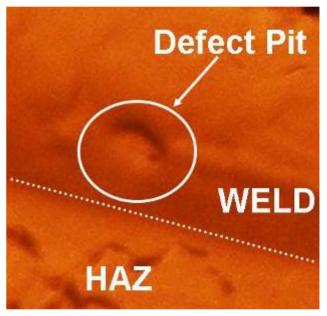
Defect located with second sound on a cavity equator weld. The defect is circles and the weld and heat affected zone (HAZ) are labeled [9].
